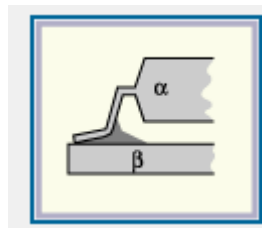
A cross-section through solder structure – compliant leaded chip carrier (gull wing)
